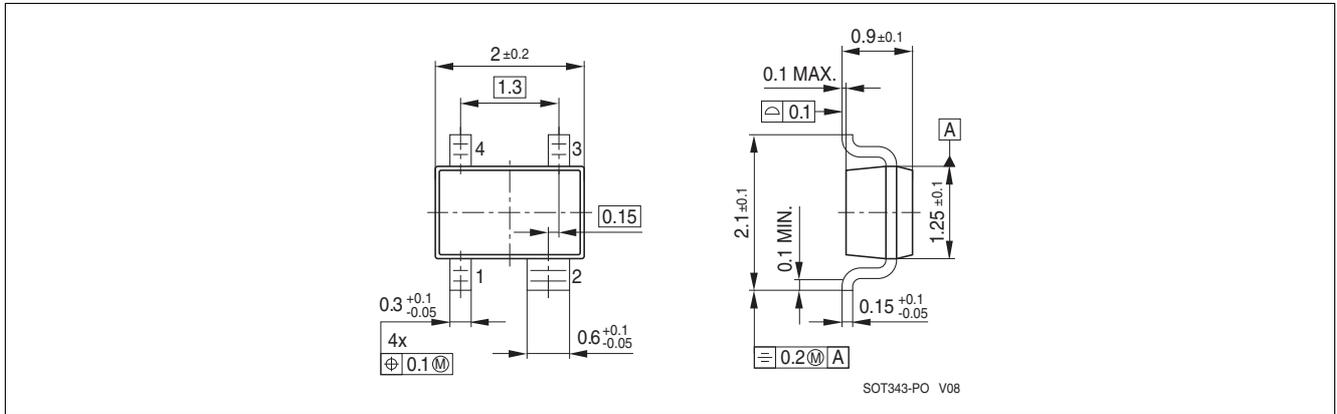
Package Outline for SOT343 (dimensions in mm)
